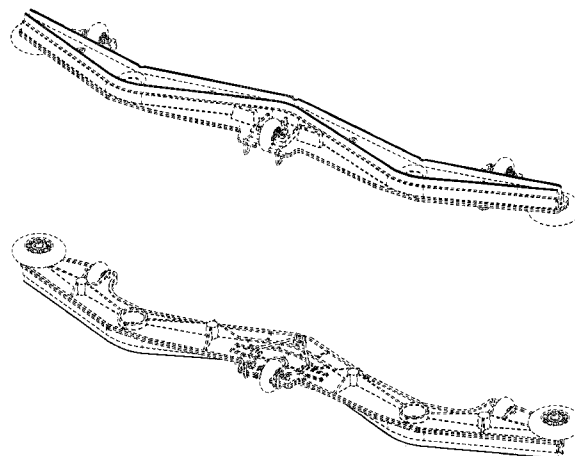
is a rear view of the squeegee support frame shown in FIG. 15.
